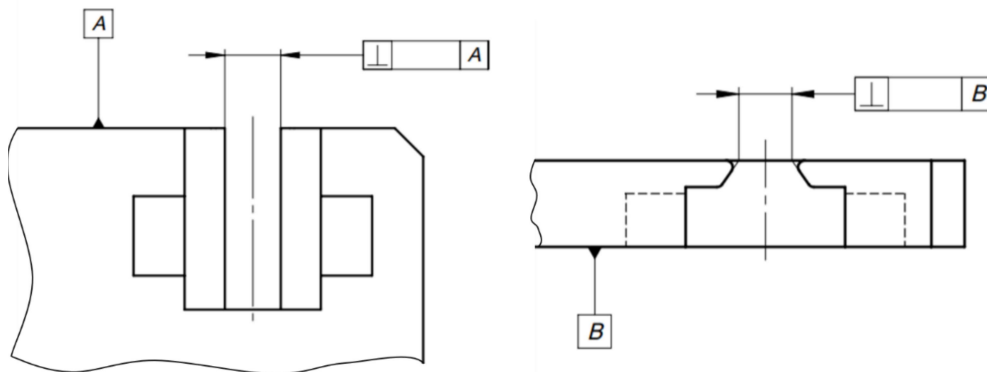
Blade Slot Geometric Tolerances Representation
